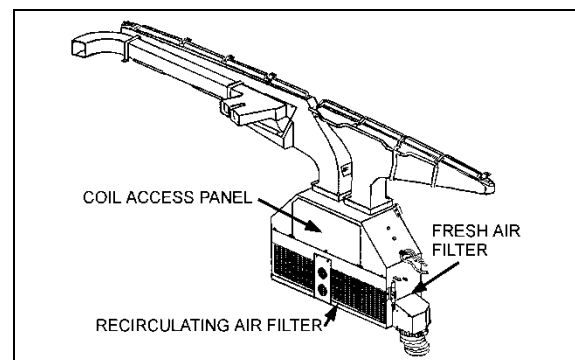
DRIVER'S HVAC UNIT COIL ACCESS PANEL
